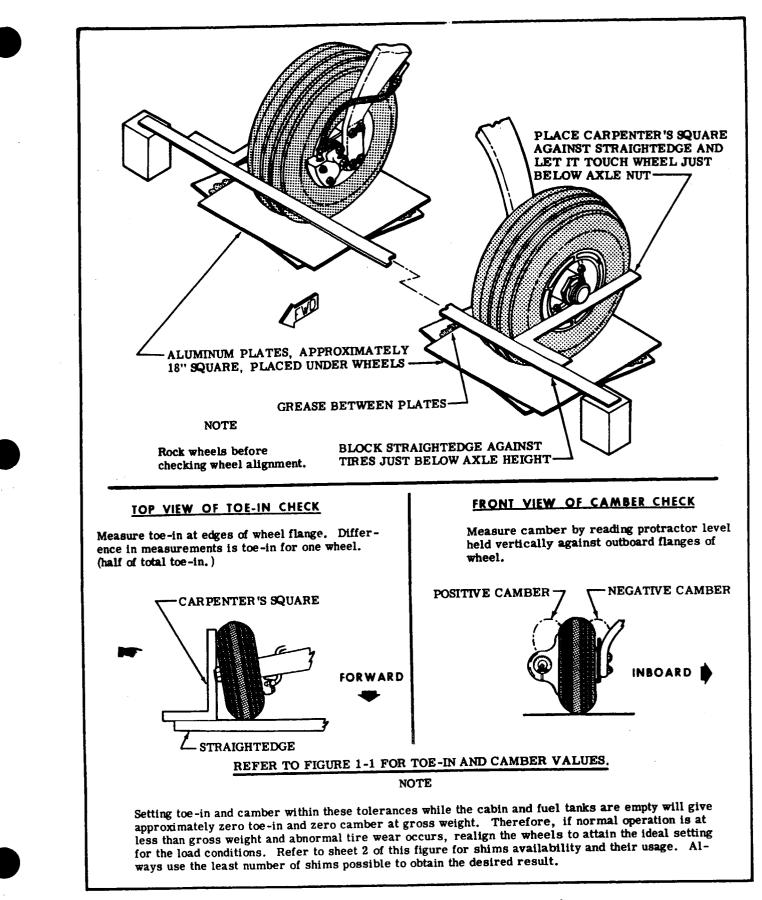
Main Wheel Alignment (Sheet 1 of 2)
